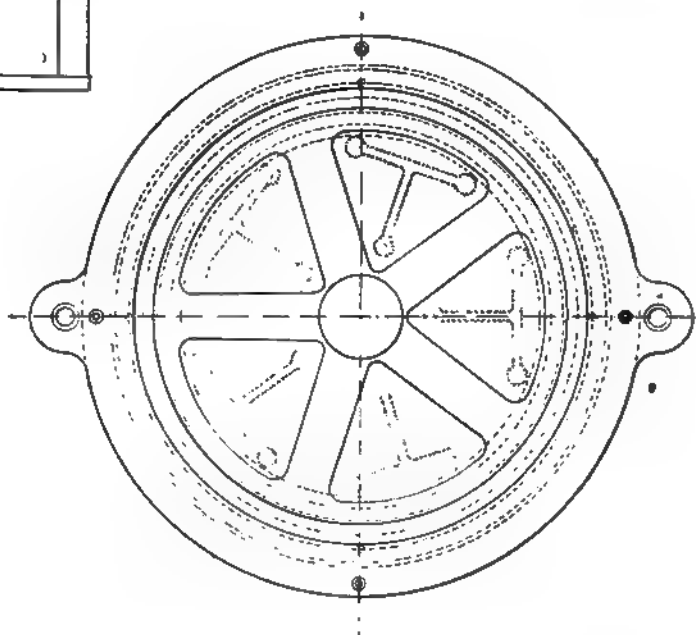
Pattern Arrangement for Top Part of Mould.
